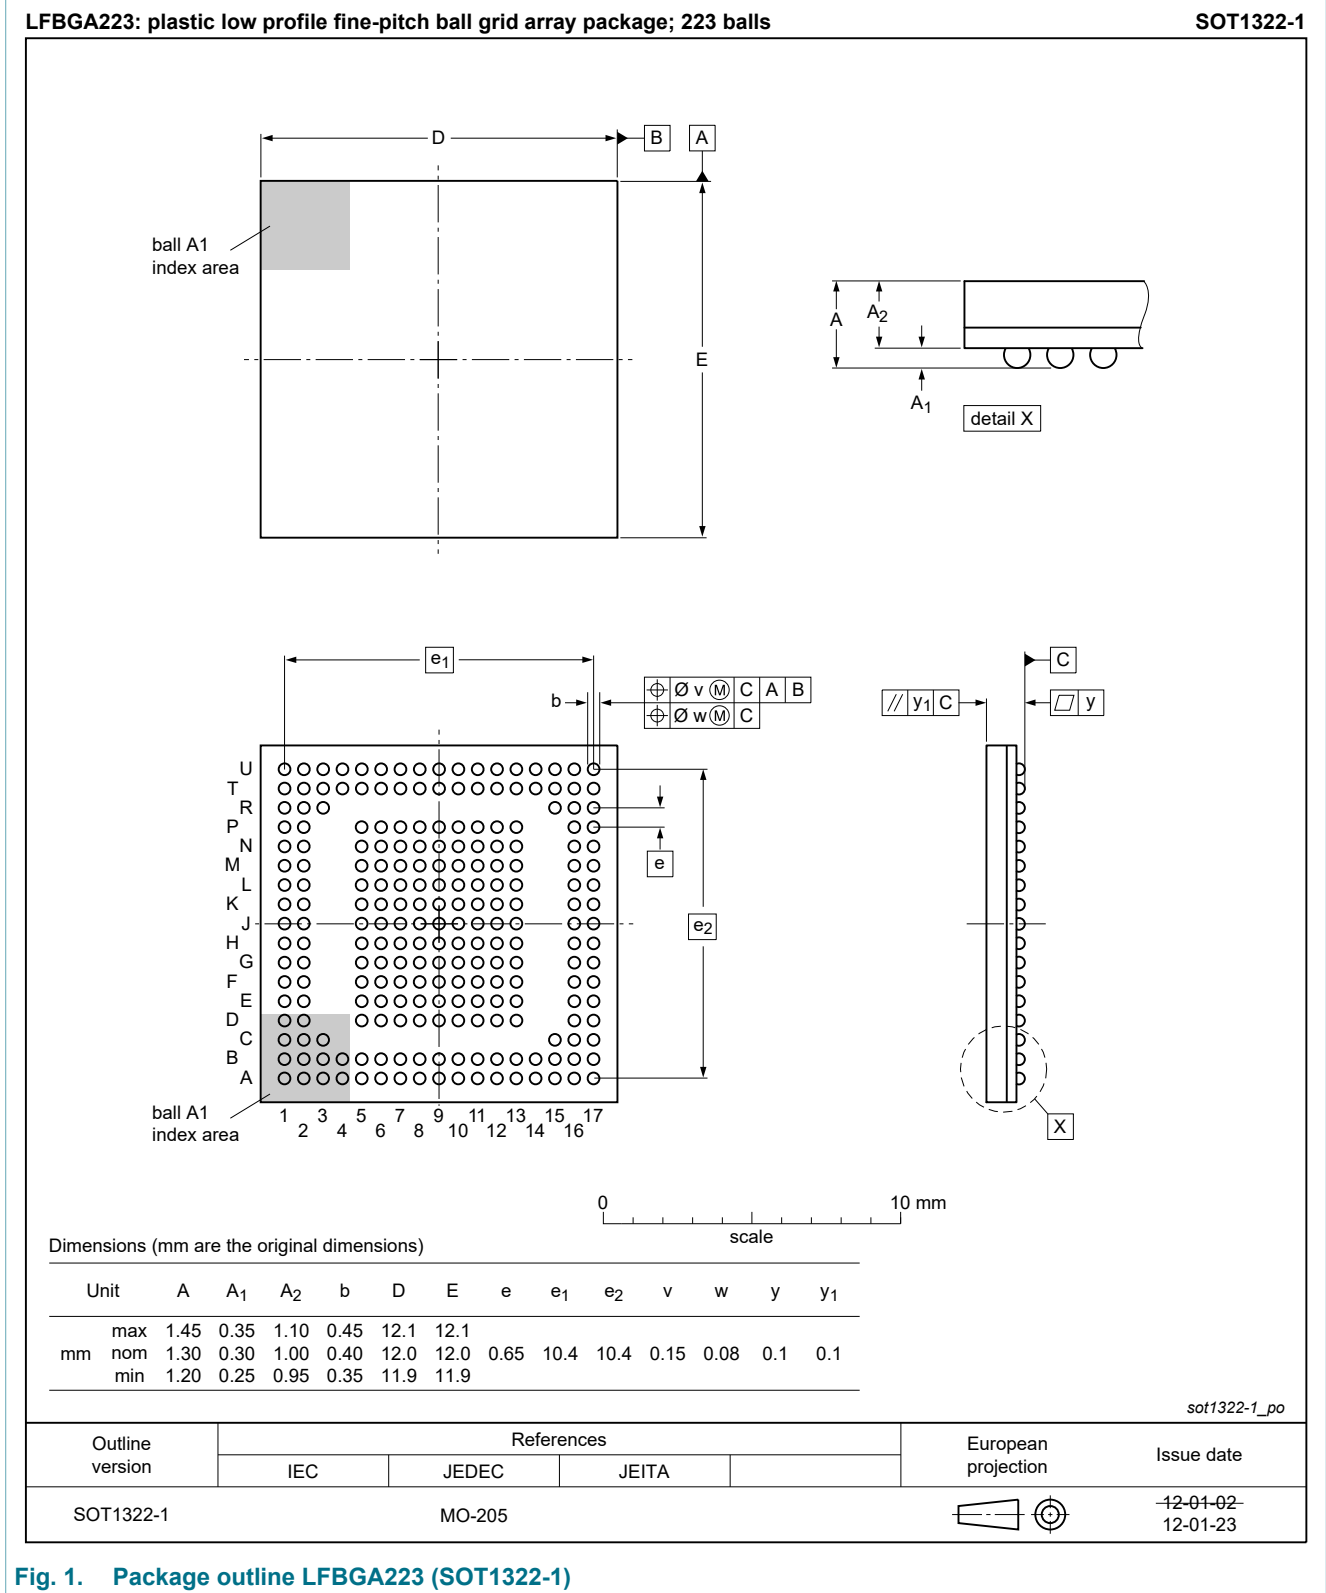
Package outline LFBGA223 (SOT1322-1)
